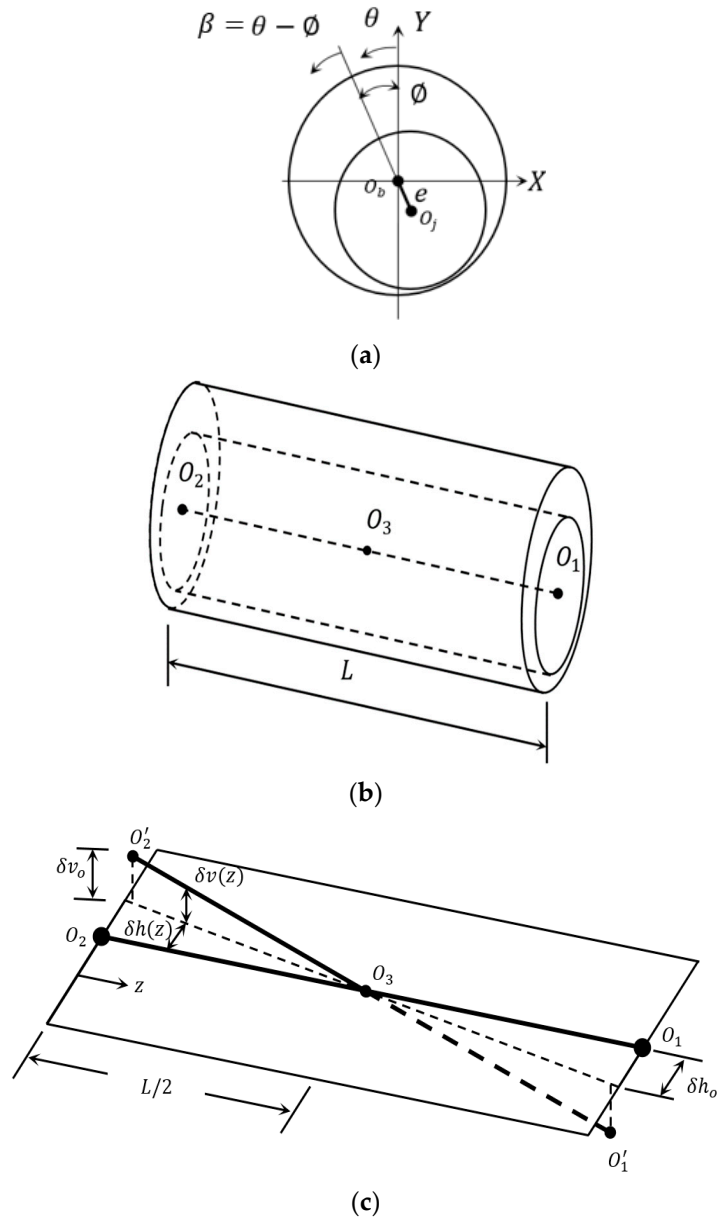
Journal bearing geometry. (a) Two-dimensional aligned journal bearing (side view); (b) 3D perfectly aligned journal bearing; and (c) the adopted misalignment model [38].
